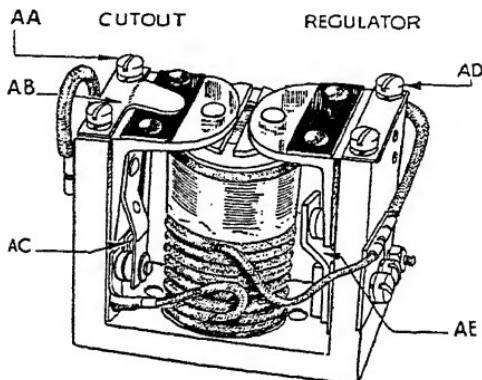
C.A.V. BOSCH COMBINED CUT-OUT AND REGULATOR
